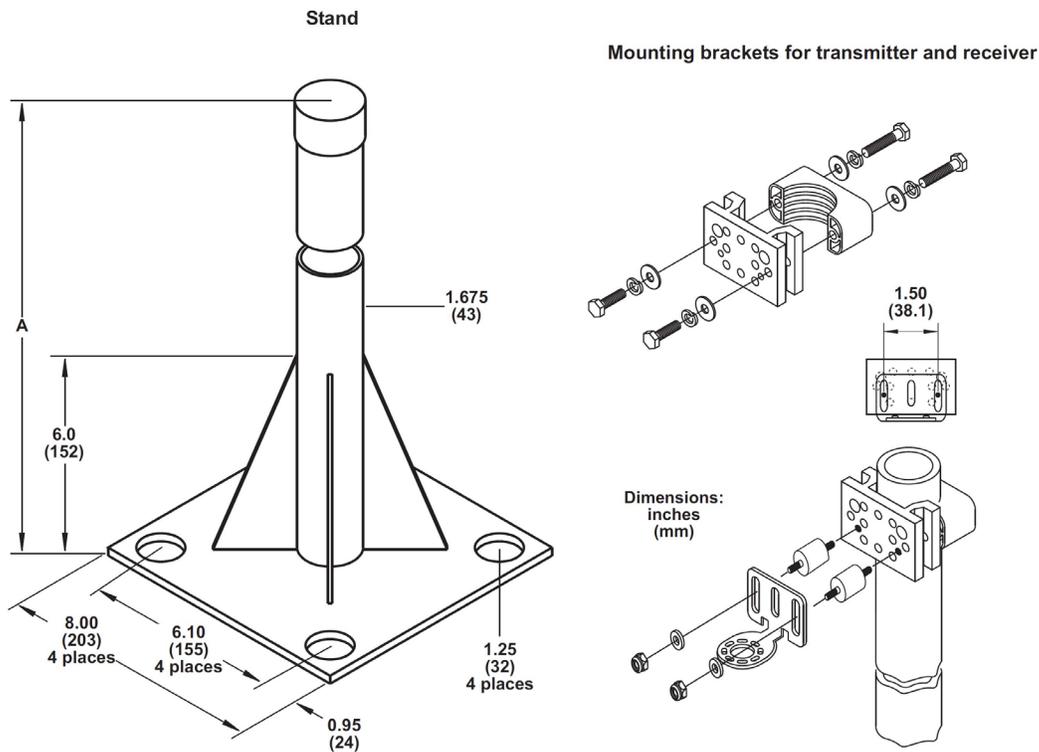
Shadow 9 Stand Dimensions (Shown with Mounting Brackets for Heads)
